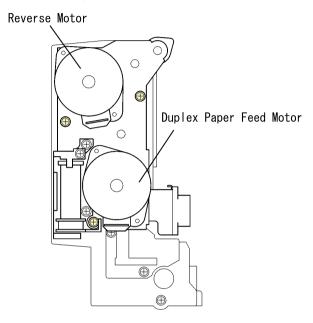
Reverse Motor / Duplex Paper Load Motor
